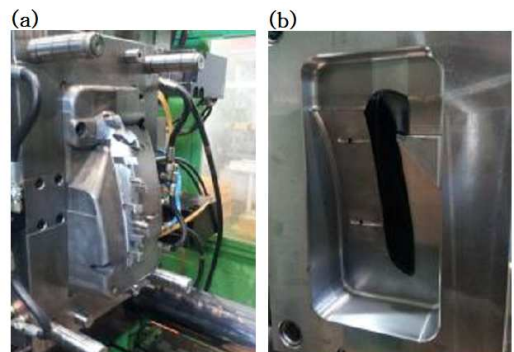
Photographs of (a) movable mold, and (b) stationary mold
